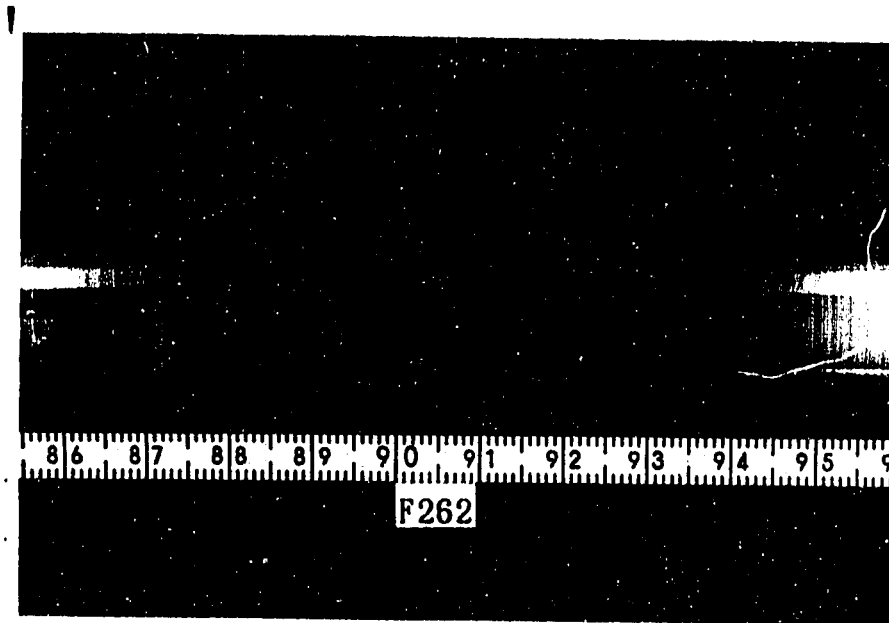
Appearance of fatigue test piece after failure - F262
